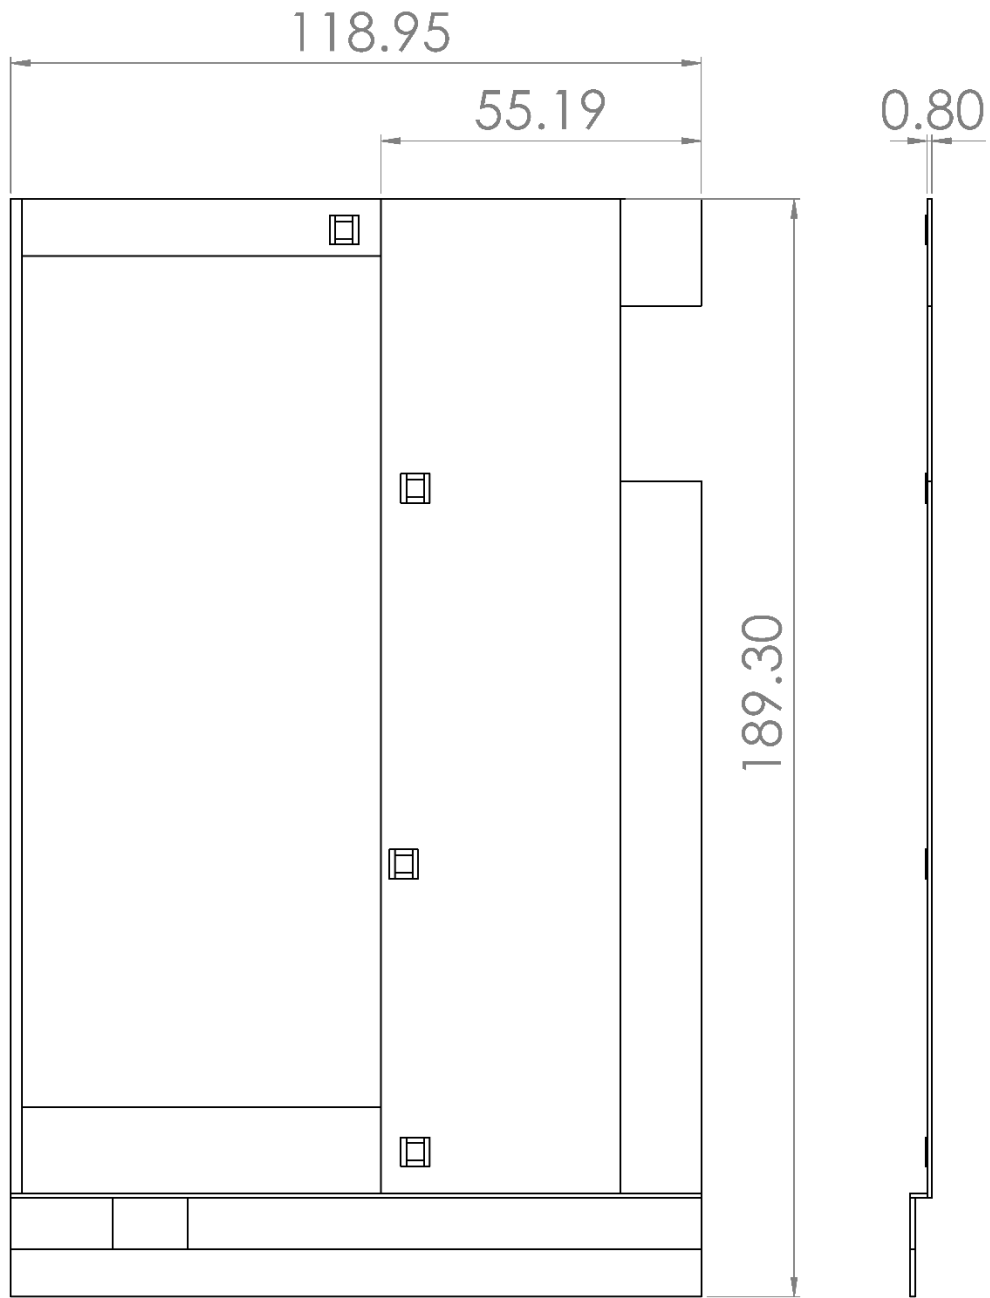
Dimensioned drawing of the magnesium spreader, dimensions given in mm
